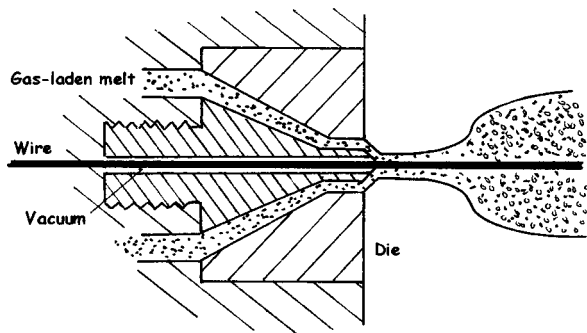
Schematic of wire-coating or crosshead die with vacuum seal
